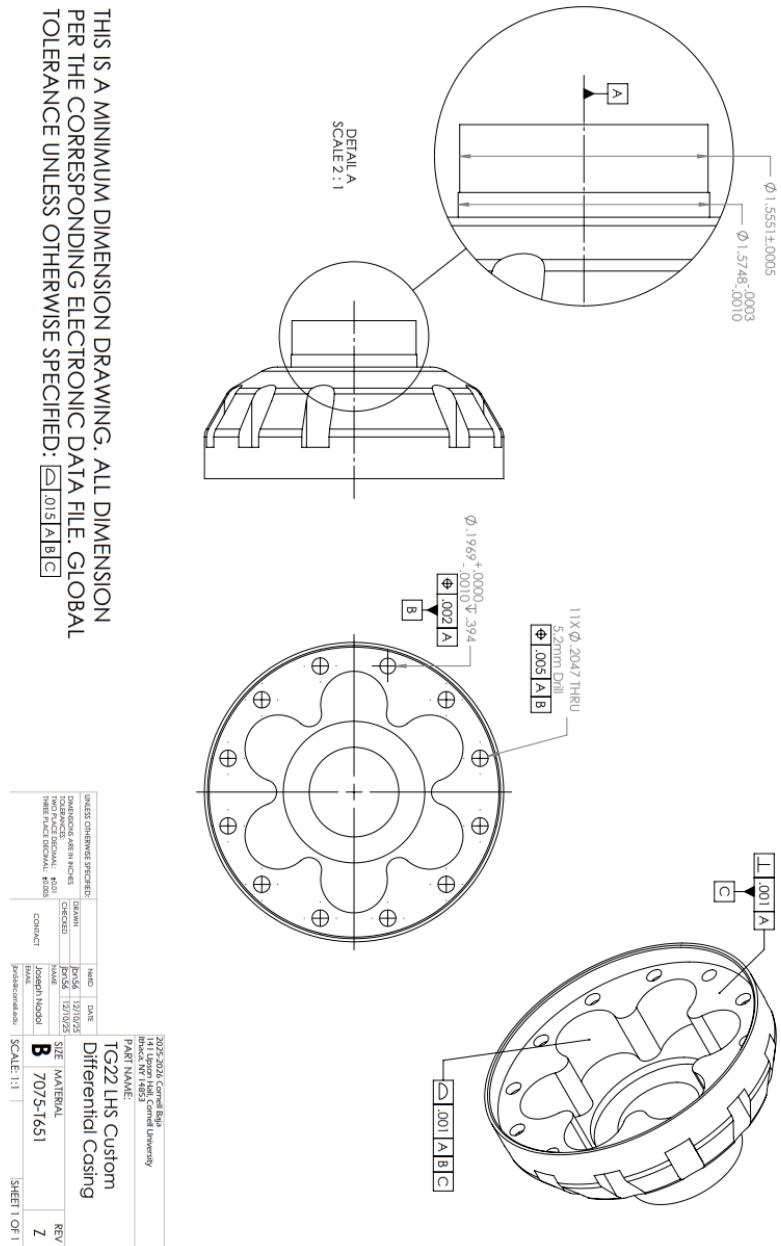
GD&T Drawing for the left-hand casing side. Datums defined as part centerline, locating pin, and mating surface. Important features controlled: bolt pattern, surface profile of the sleeving press, SpeediSleeve press.
